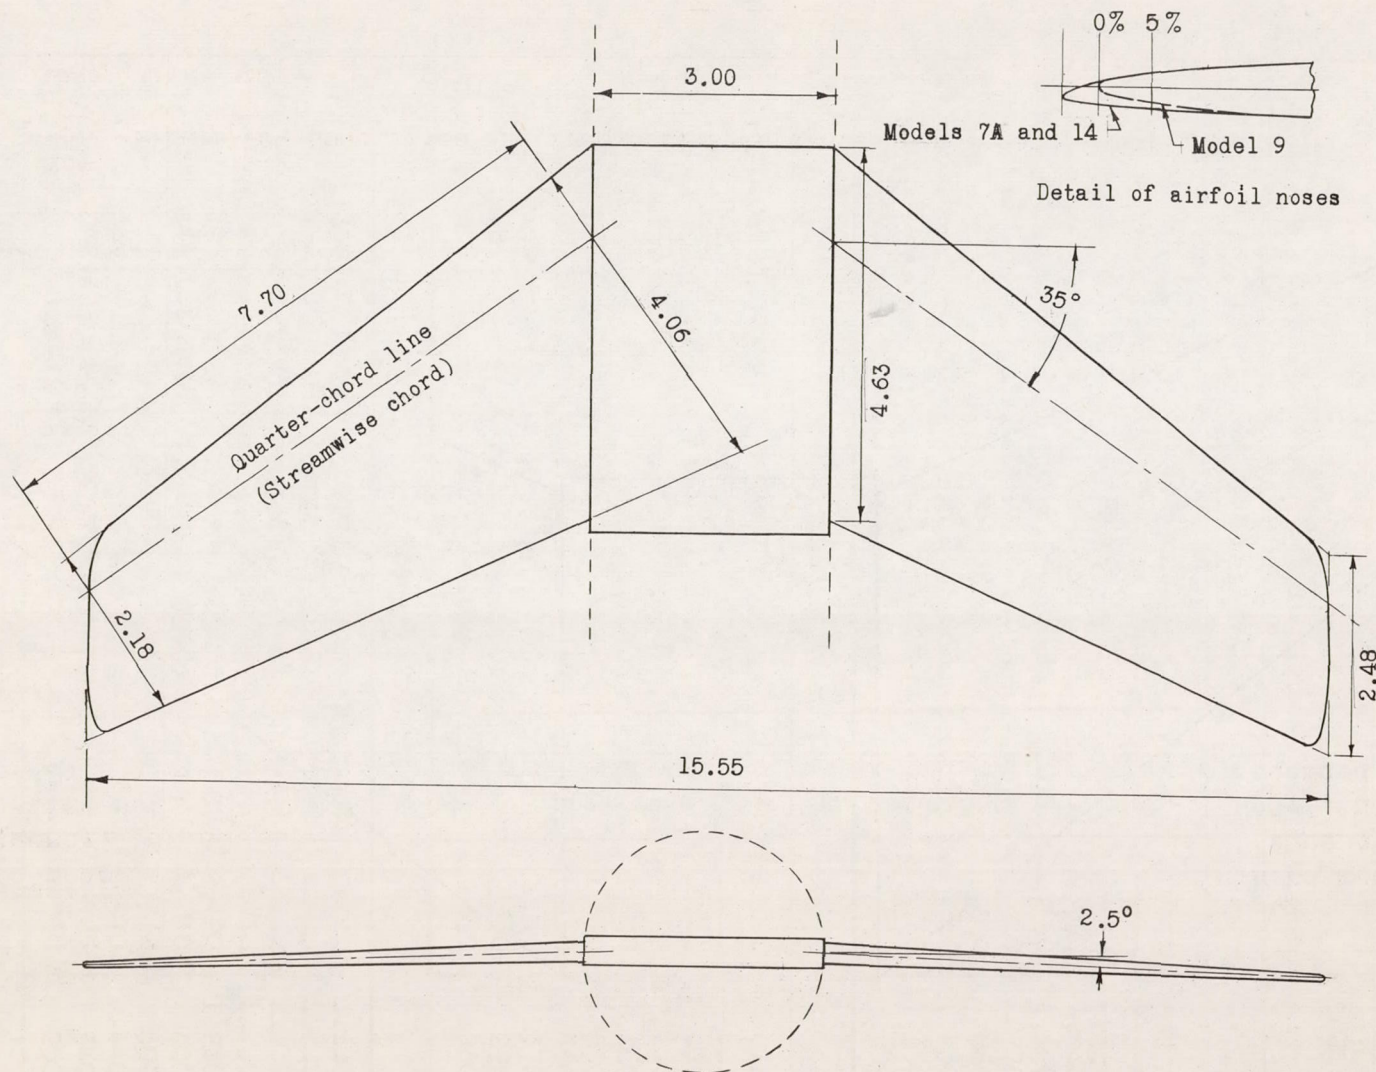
Wing model for flutter tests. Dimensions in inches.
